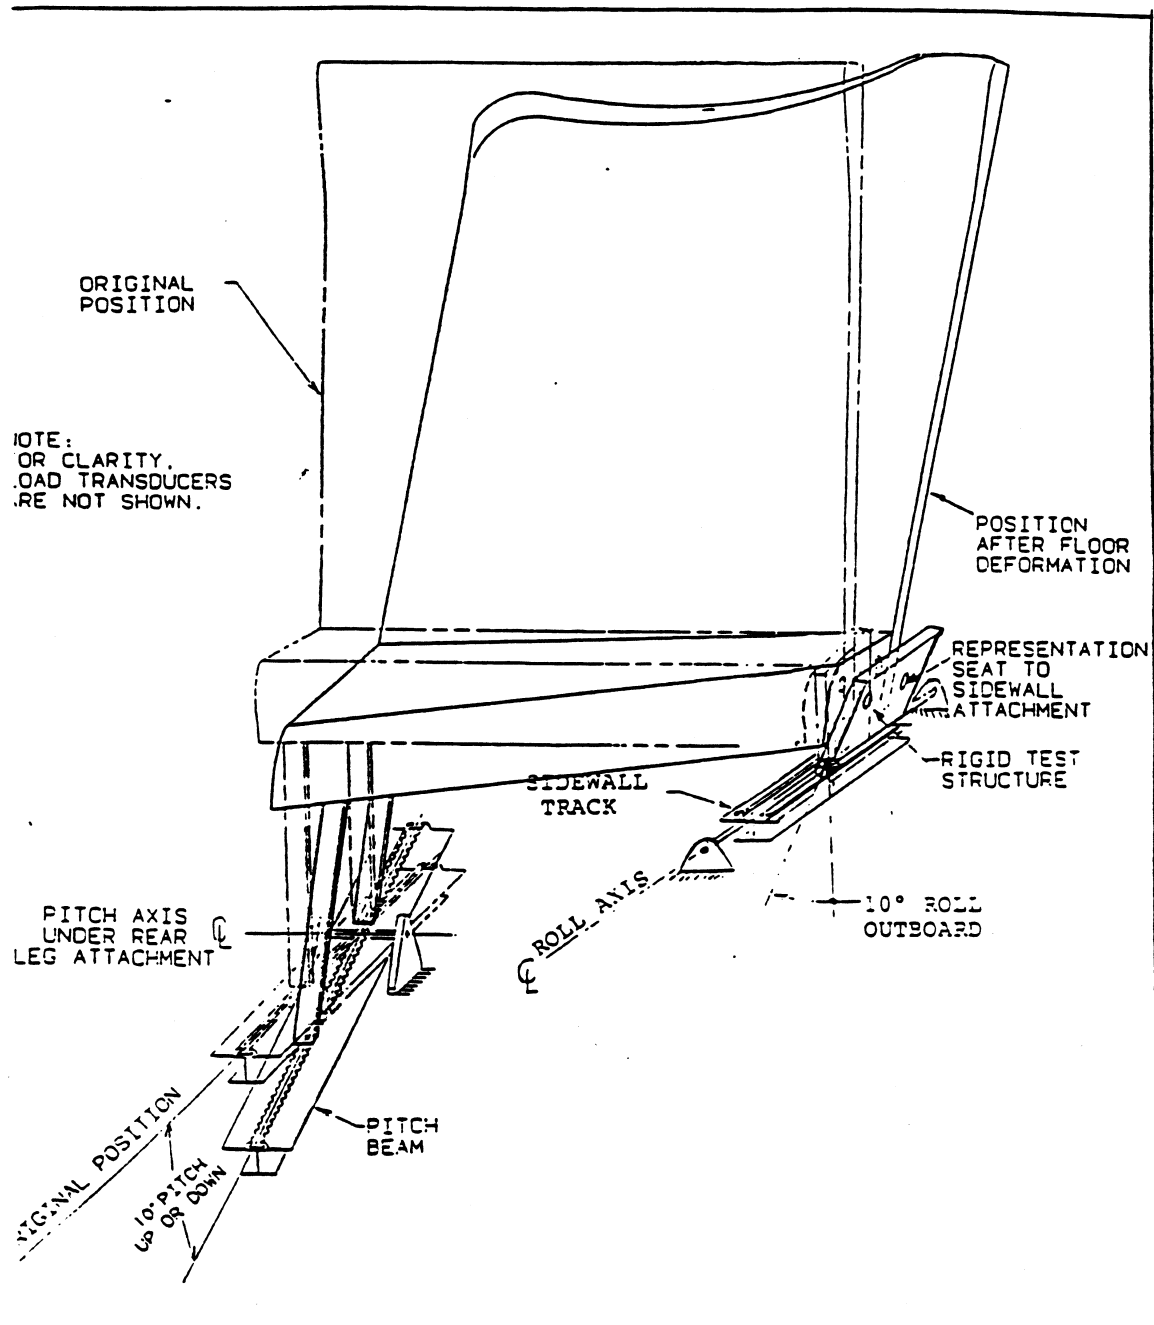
Schematic Test Fixture; Sidewall Mounted Seat
